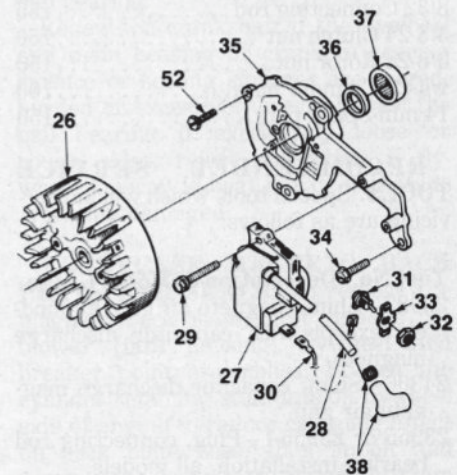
A—View of one-piece solid-state ignition used on later SXL-925 models.
